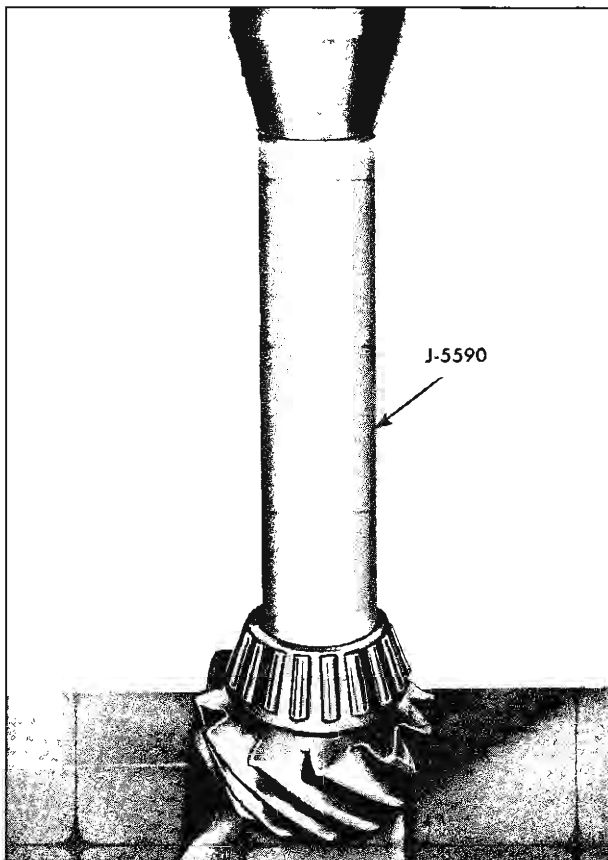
Installing Rear Pinion Bearing Cone and Roller Assembly
